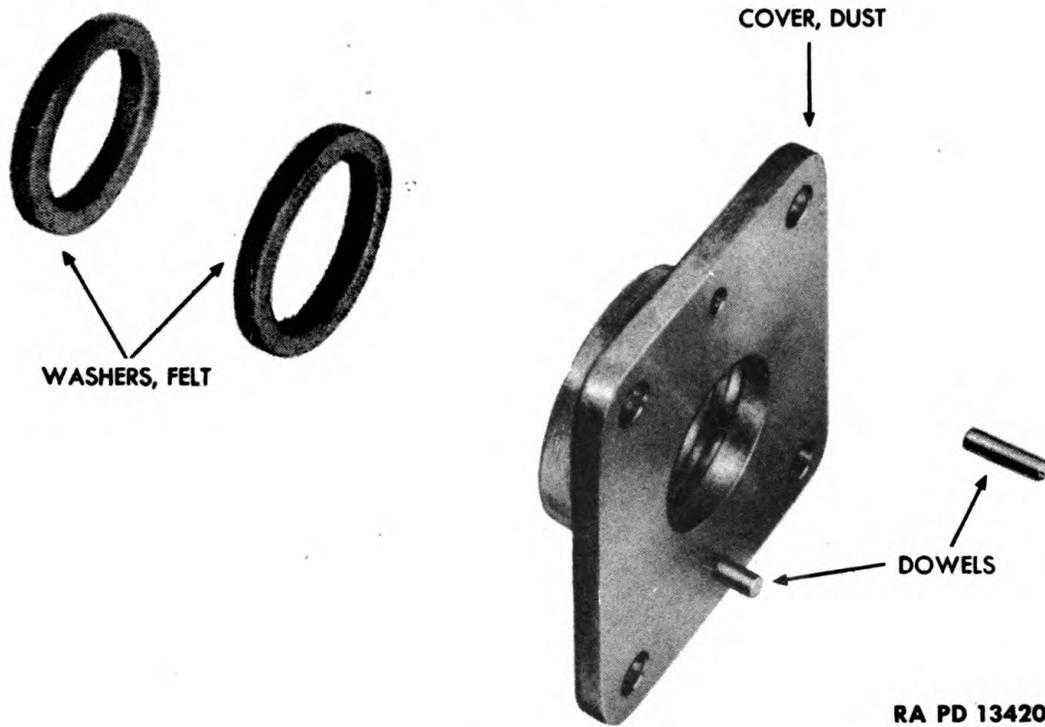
Fuel Pump Front Dust Cover—Exploded View
